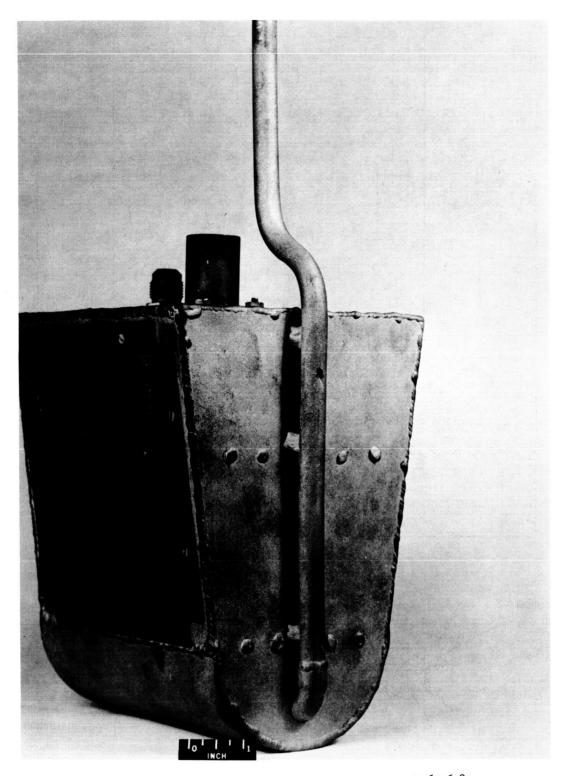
Assembly of arc-jet test specimen in steel holder.
